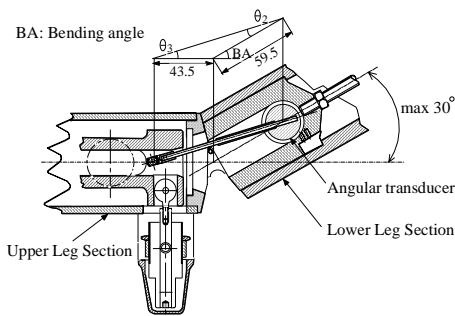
Knee of legform impactor at maximum bending angle (dimensions in mm)
